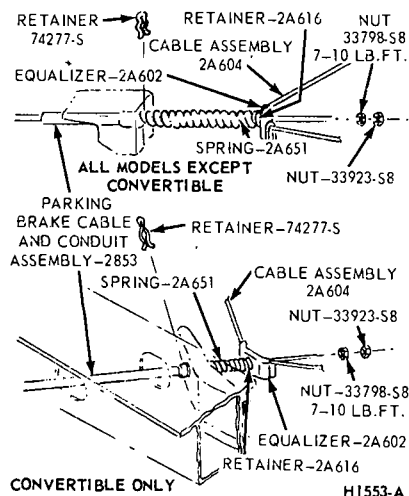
Parking Brake Linkage Adjustment — Comet, Fairlane and Falcon
